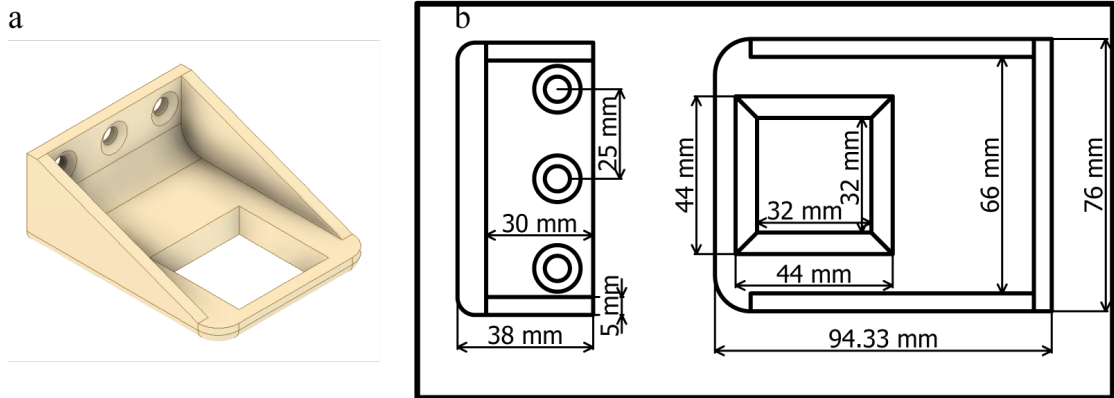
Universal holder for *in vivo* measurements. a: CGI of universal holder. b: projected view of universal holder, providing its dimensions. All units in millimeter.
